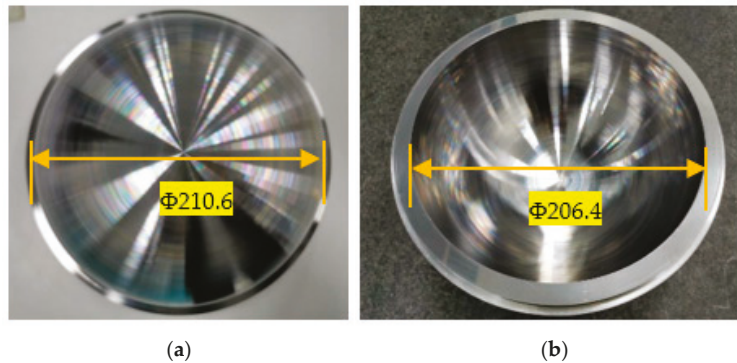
The processed spherical shell: (a) the outer surface; (b) the inner surface.
